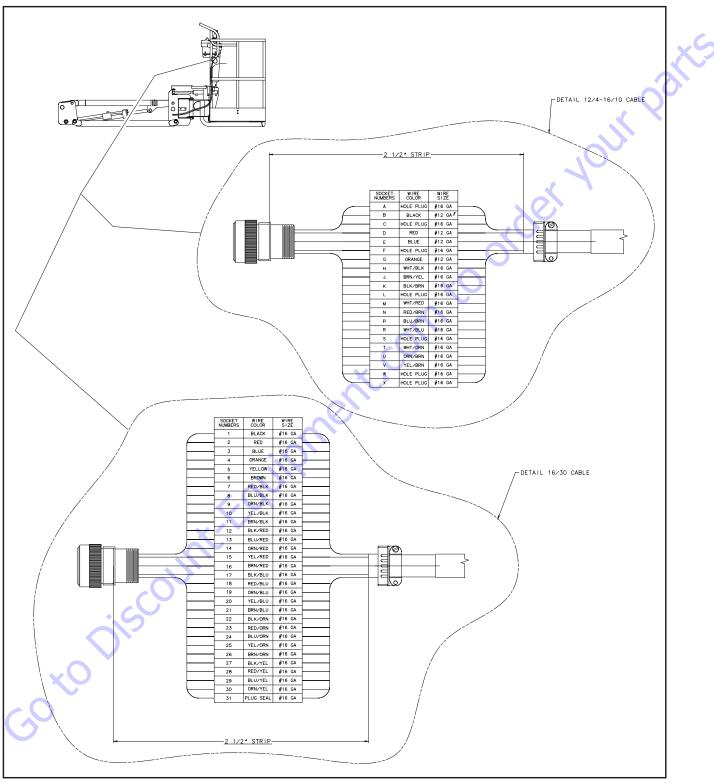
Hose and Cable Installation and Routing - Sheet 5 of 5
